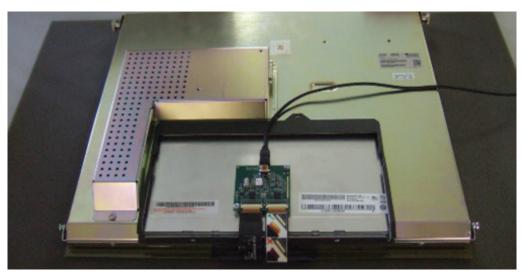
USB CABLE PLUGGED INTO CONTROLLER PCB
